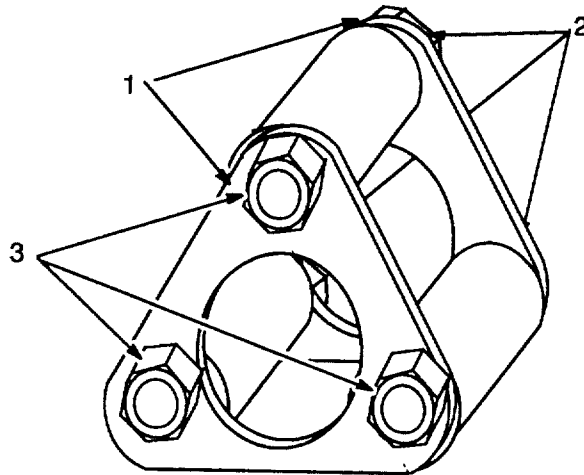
The Link Assembly, Coupling, 3-Point.
